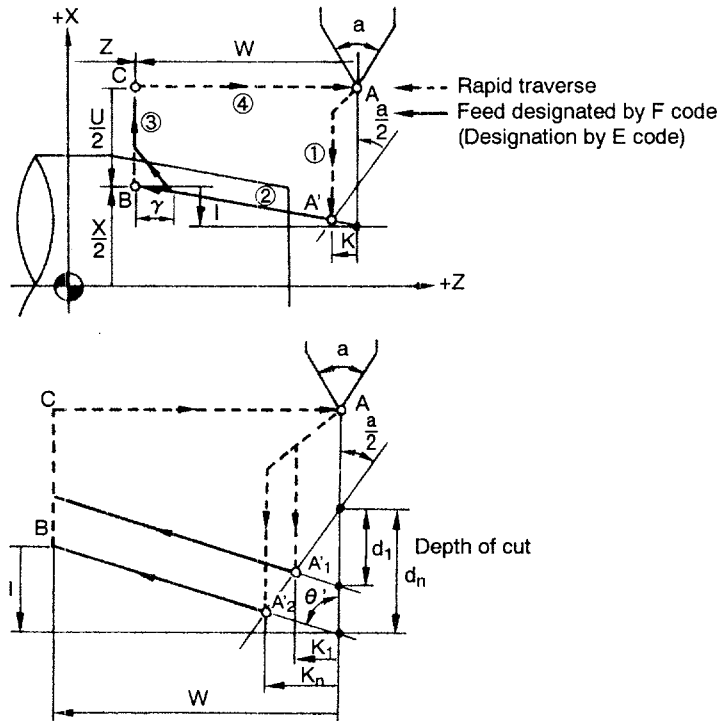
Tapered Thread Cutting Cycle (In-feed Along Thread Angle)
